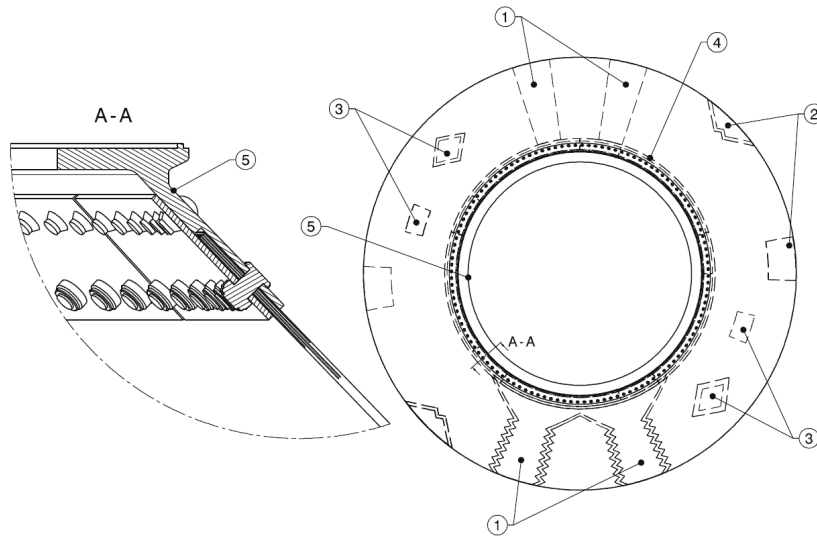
Payload adaptor with multiple hybridized zones: circumferential upper root joint reinforcement (4), discrete lower root joint reinforcement (2), line reinforcement along generatrix (1), local reinforcements(3), detail of the aluminium fitting (5) [6].
